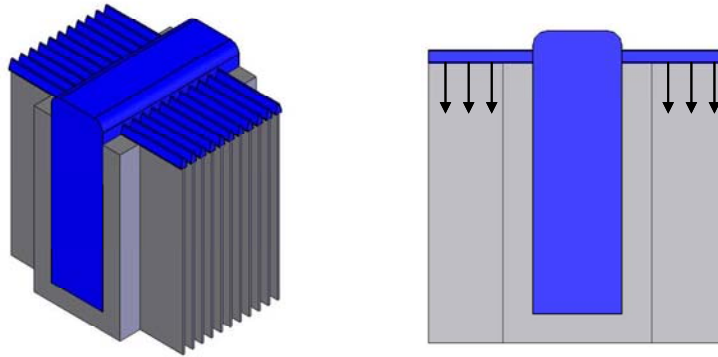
Isometric and side views of longitudinally cooled heat sink with actuator module
